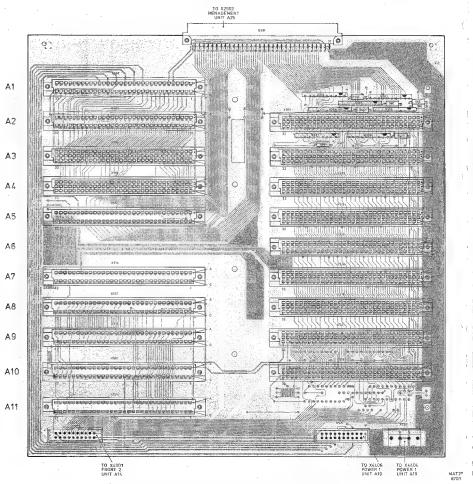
Unit Al2 - MOTHERBOARD - p.c.b. lay-out.
